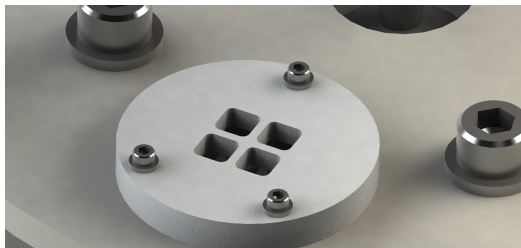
CAD-model of the SiPM collimator. The inner edge roundings will during caused the manufacturing.
